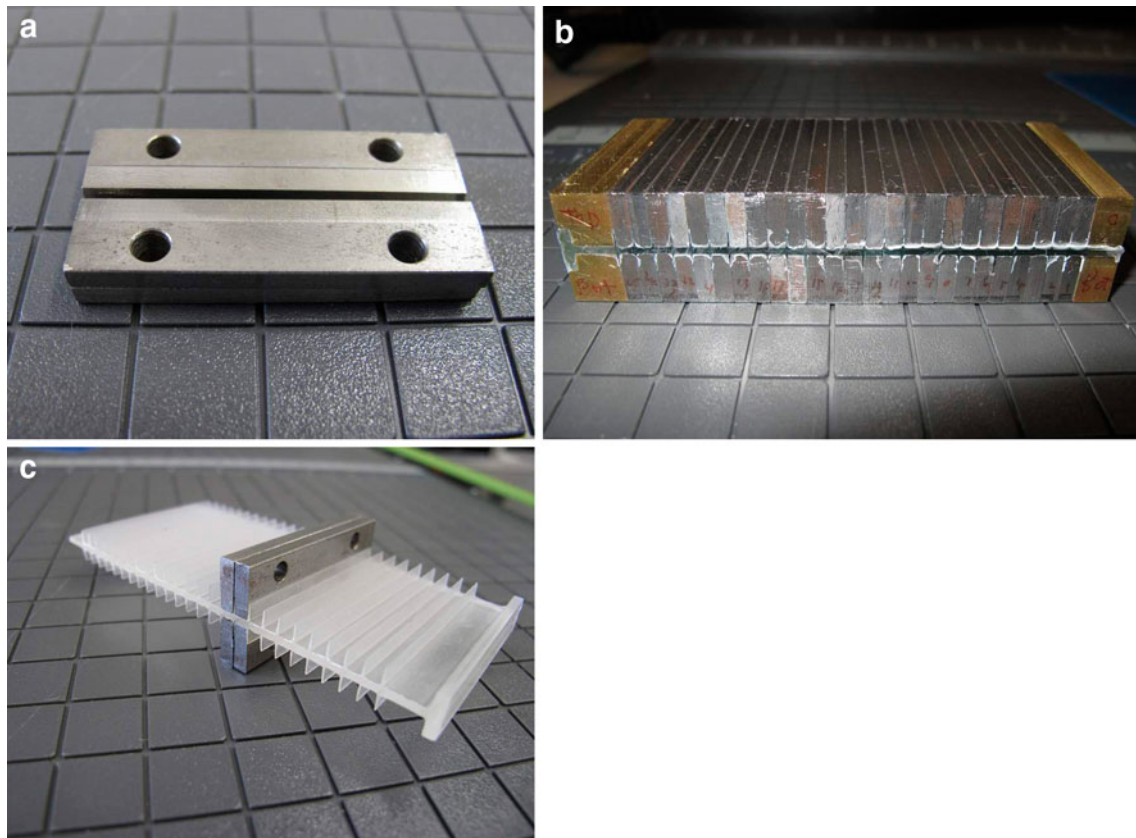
Double-sided agitators made by a double-sided hot embossing process, with assembly mold inserts. a Metal bar with trenches on both sides. b Polymer agitators embedded in a mold insert before demolding. c Hot embossed, double-sided polymer agitators
